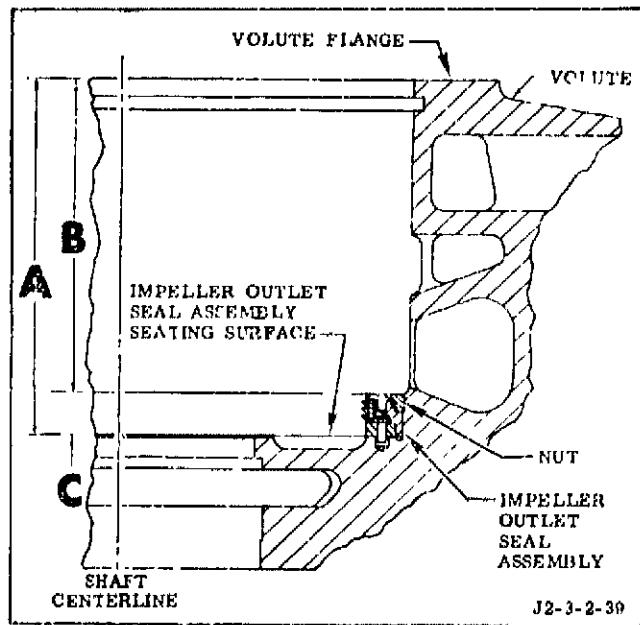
Dimensional Requirements for Installing Impeller Outlet Seal Assembly
